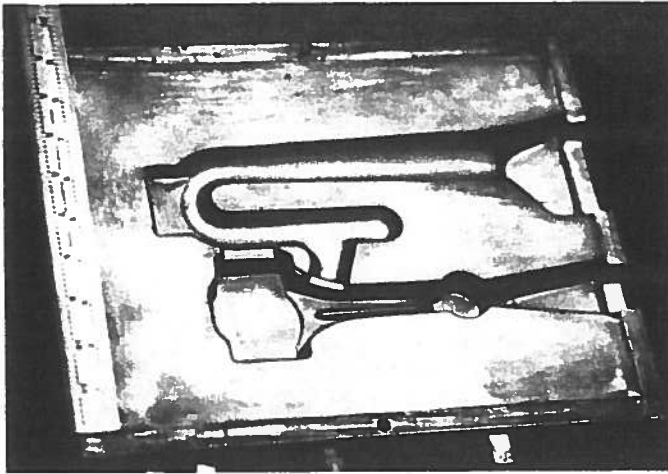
Connecting Rod Casting Tool — Face of Sprayed Shell
